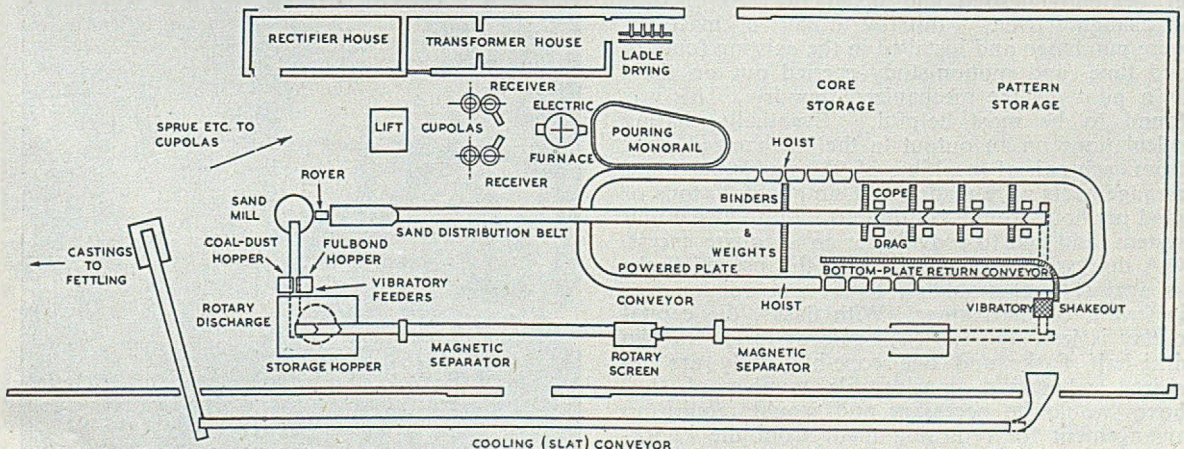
General Layout of a New Mechanized Plant at Ley's Malleable Castings Company, Limited, for producing Castings of the Smaller Weight Range.
